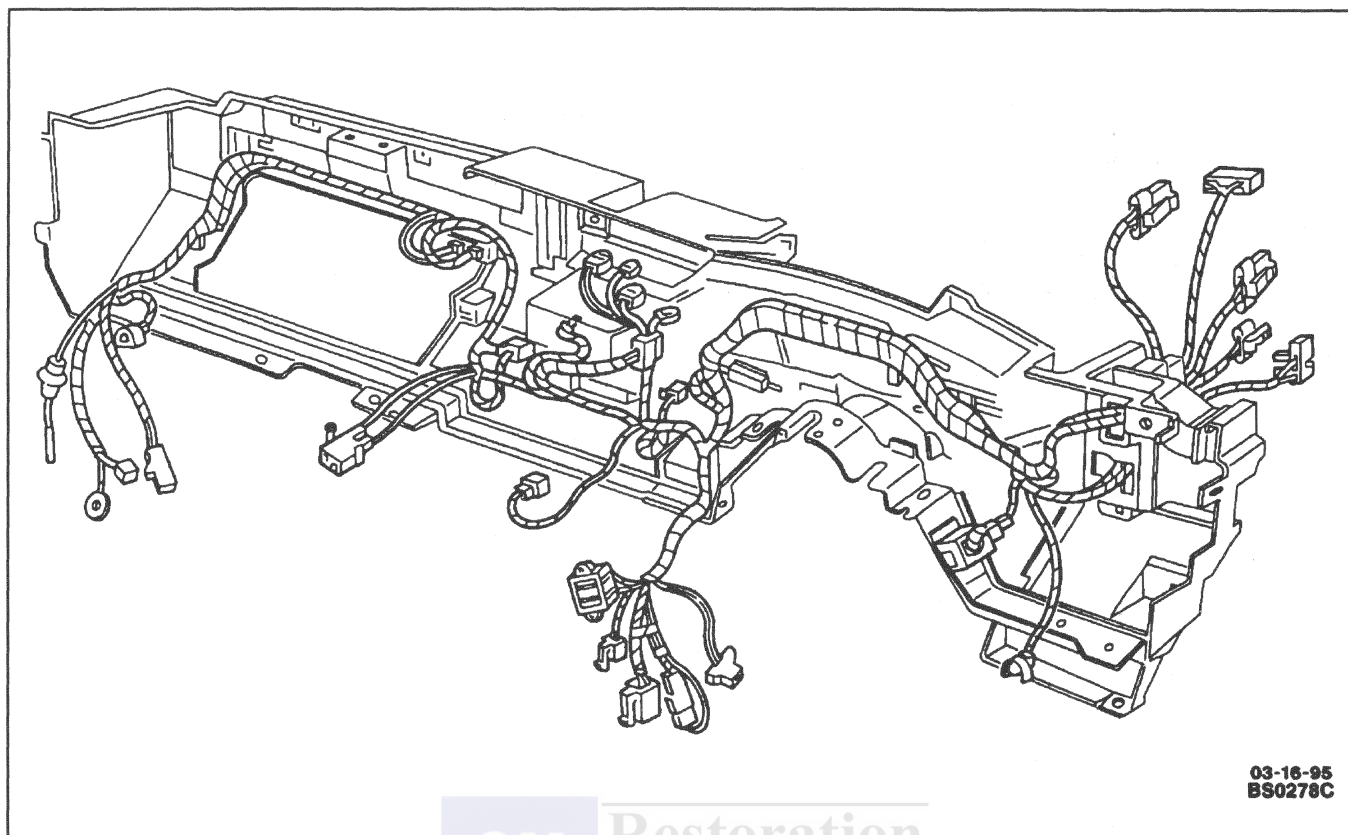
Instrument Panel Wiring Harness - (Chevrolet)
